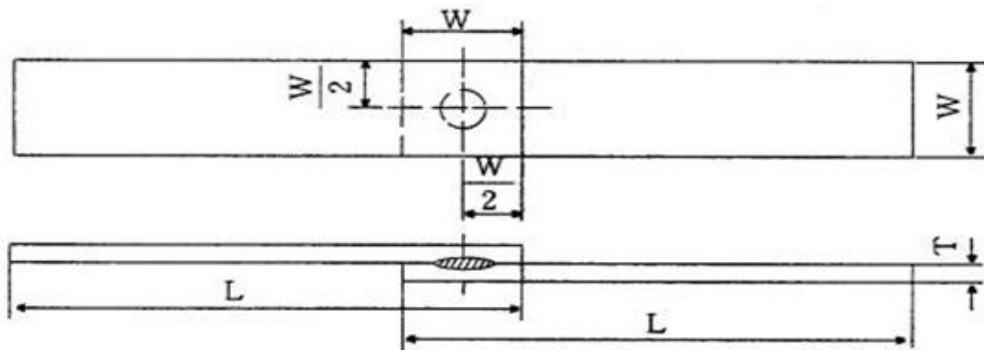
Specimen of lap-joint with single spot welding
